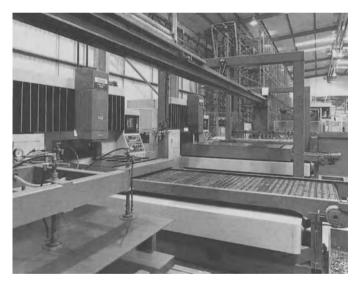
Sheet metal working – laser path cutting machines, CNC folding and bending machines, together with automatic welding machines. [Courtesy of Yamazaki Mazak Ltd.]
